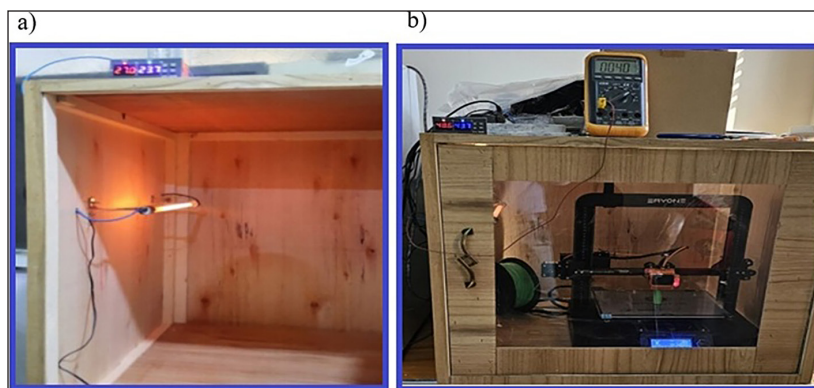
The adopted system: (a) heater fixed inside the enclosure connected with thermostat stc-3008 above the enclosure, (b) 3D printer inside the enclosure
